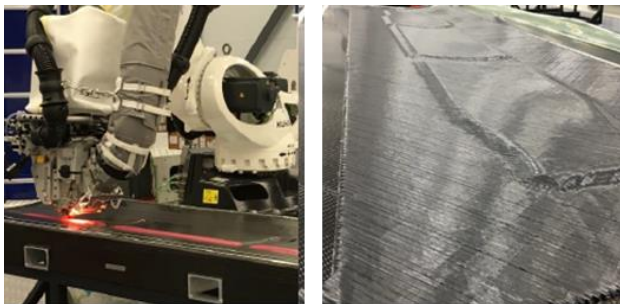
AFP manufacture of honeycomb sandwich panels.
